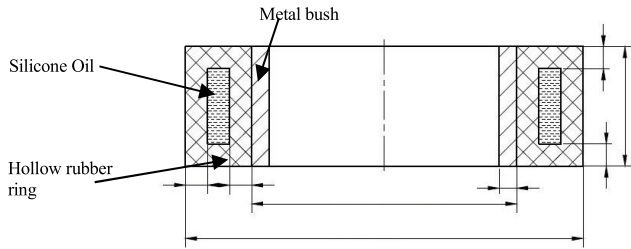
Drawing of rubber-silicone oil combined damper.
